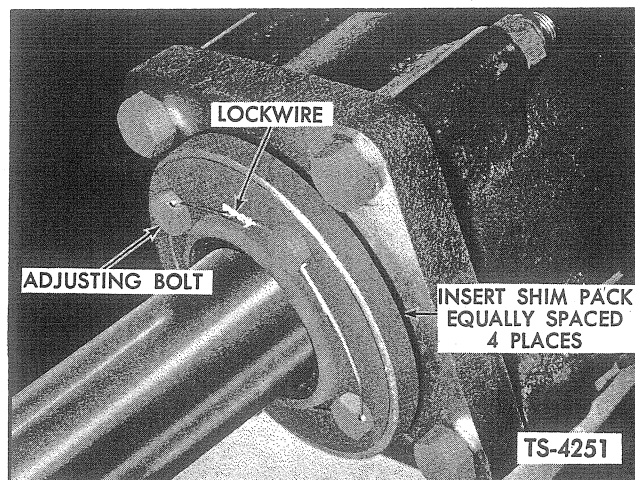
Adjust Packing Gland (Bucket Cylinder Shown)
